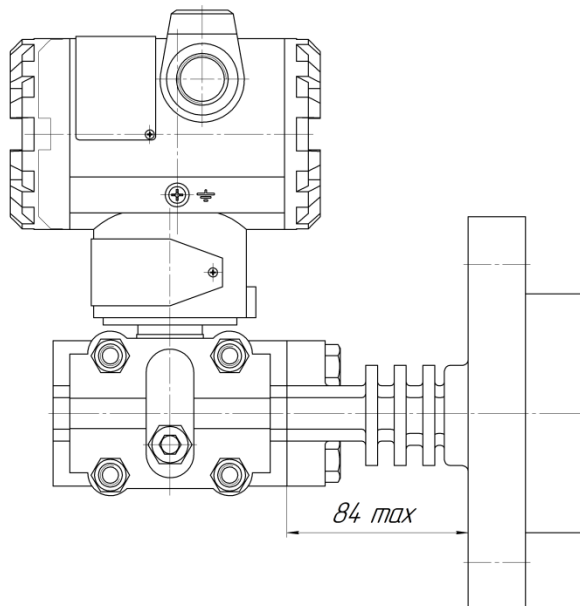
Dimensions and connection sizes of special version of traditional-mount pressure transmitters EMIS-BAR 163. Flange sizes are given in the pages 73-76.
